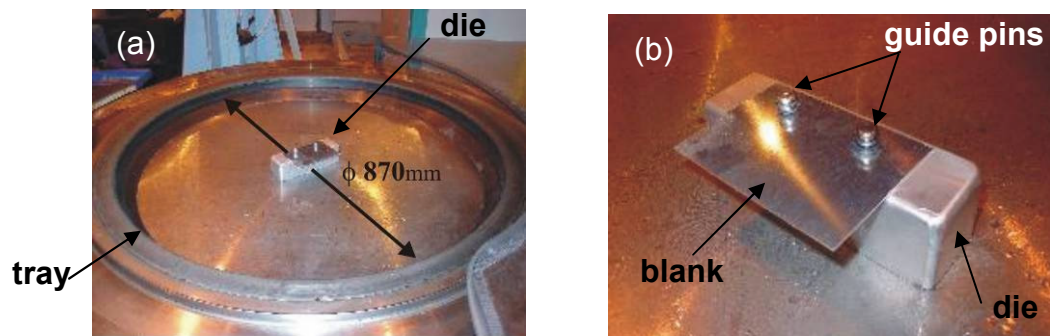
Flexform tools: (a) Tray of the flexform press with the die and the blank, (b) Guide pins for fixing the sheet onto the die
